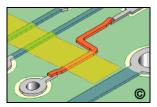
Form the shape of the Circuit Track and hold in place with Tape.
